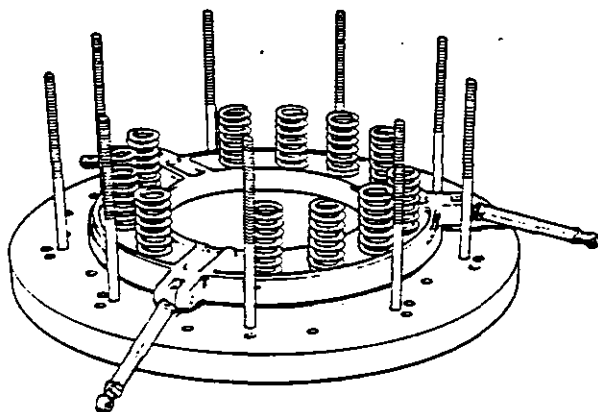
ASSEMBLING PTO PRESSURE PLATE
